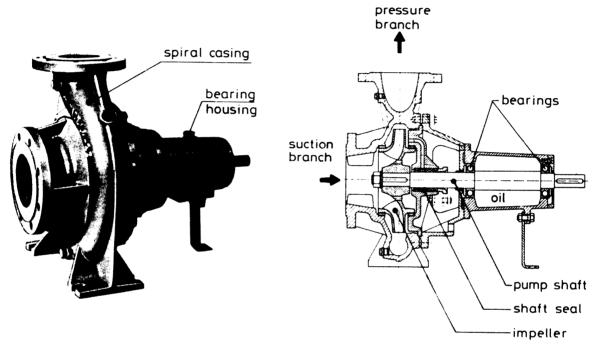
Single-stage spiral casing pump/PAT of the classic design
